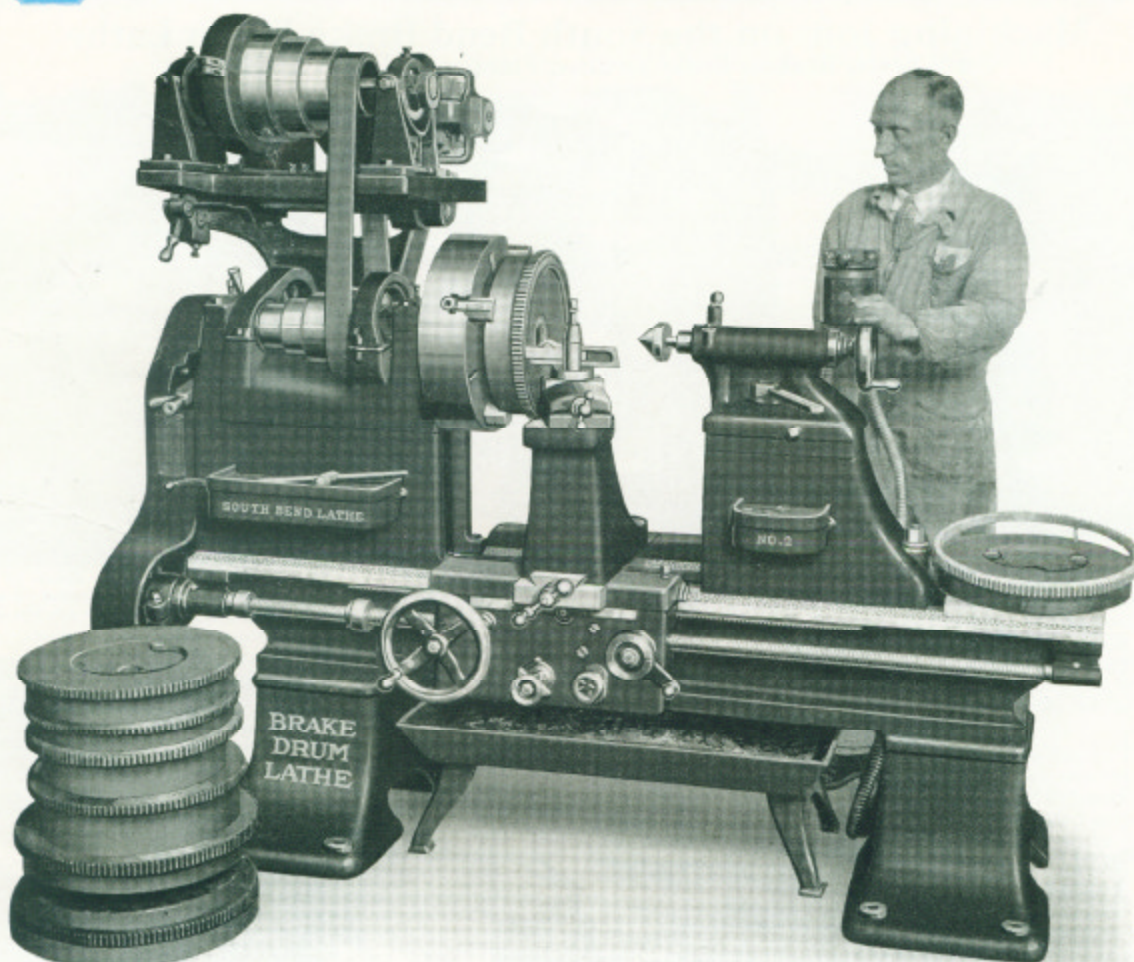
One operator can machine and fit from 20 to 25 flywheels for ring gears in about eight hours.
